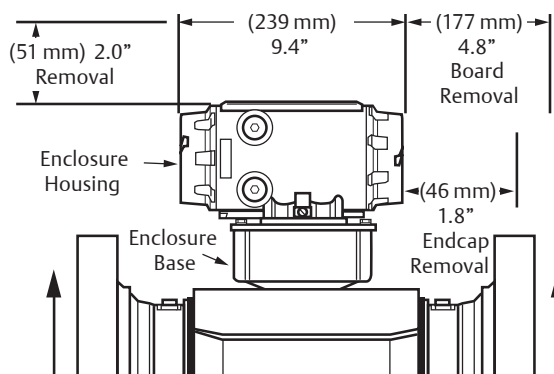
D: Optional installed position of enclosure housing<sup>(2)</sup>
